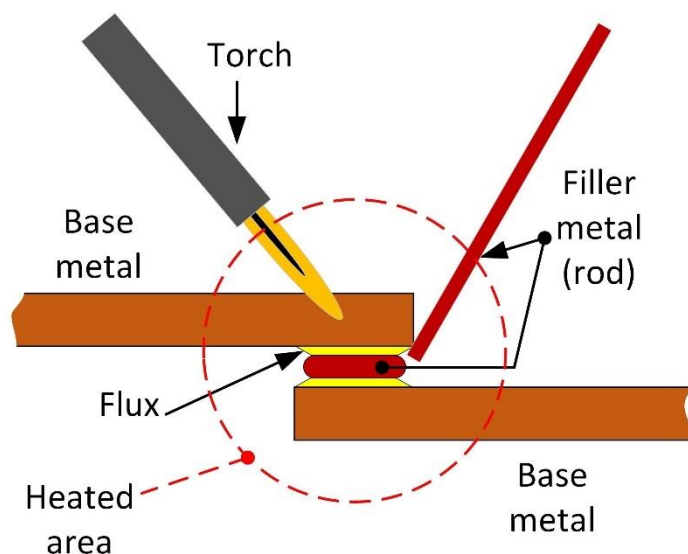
The basic principle of a brazing process (Source: HEAT GmbH)
